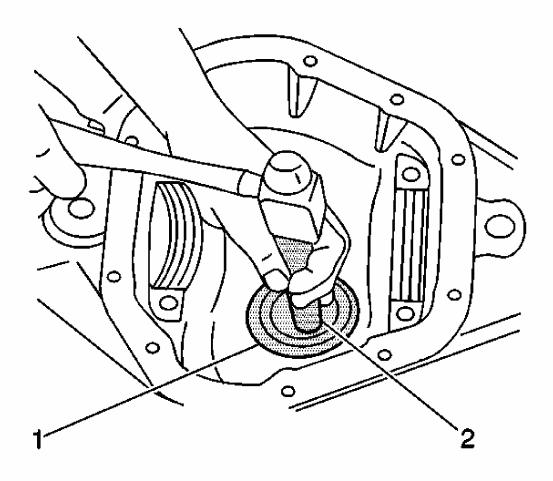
Installing Inner Pinion Bearing Cup Courtesy of GENERAL MOTORS CORP.
